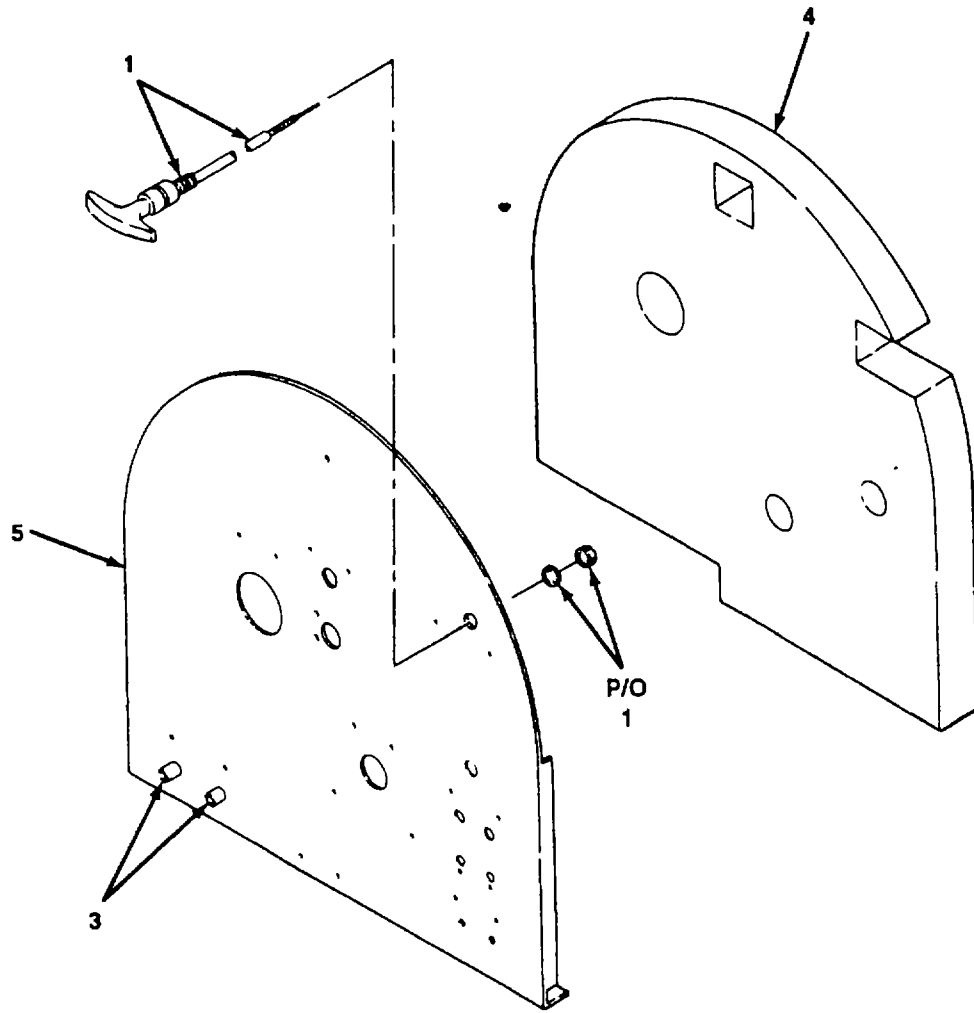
Sound Enclosure Front Panel Assembly and Mechanical Control.
